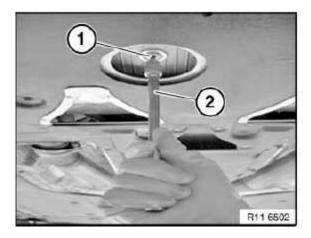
Identifying Screw Plug With Socket And Long Extension Courtesy of BMW OF NORTH AMERICA, INC.
